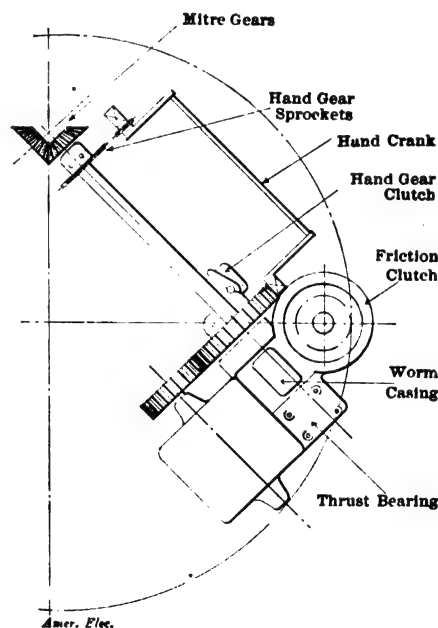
PLAN OF TURRET-TURNING GEAR.
